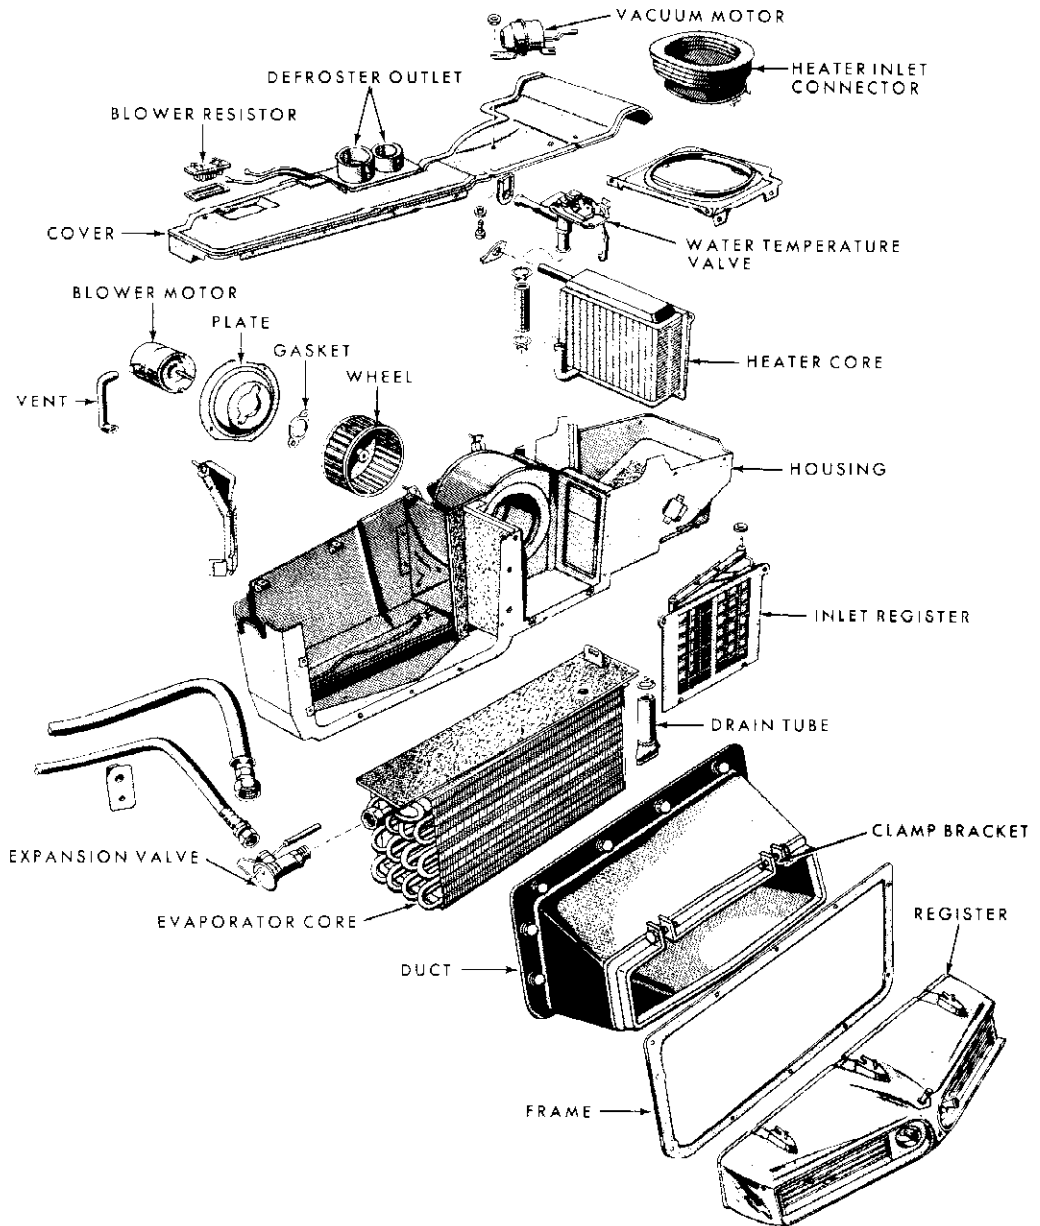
Evaporator and Blower Housing Disassembled—1961—(61MM-8810)
